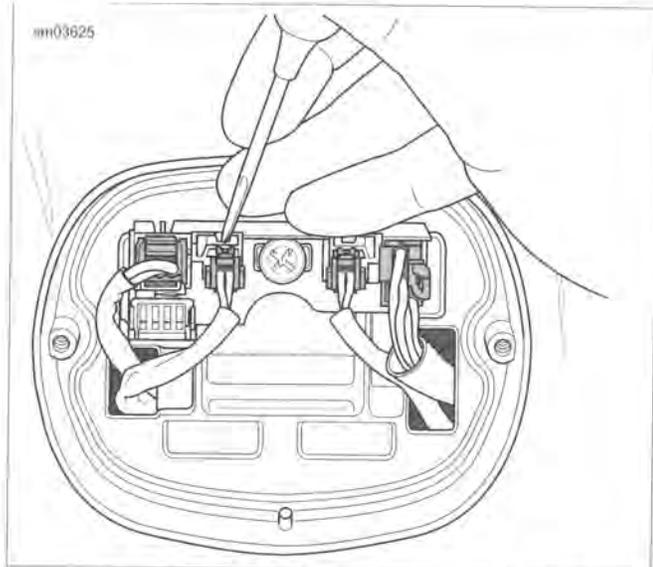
Use Pick Tool to Release Left Turn Signal Lamp Socket
